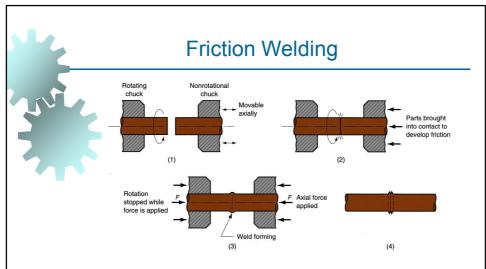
Friction welding (FRW): (1) rotating part, no contact; (2) parts brought into contact to generate friction heat; (3) rotation stopped and axial pressure applied; and (4) weld created.
